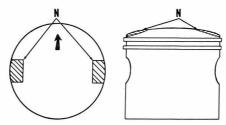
If manufacturer recommends cutting the piston (N) to advance transfer port timing, use extreme care. Depth of cut will weaken piston and possibly damage piston rings.
